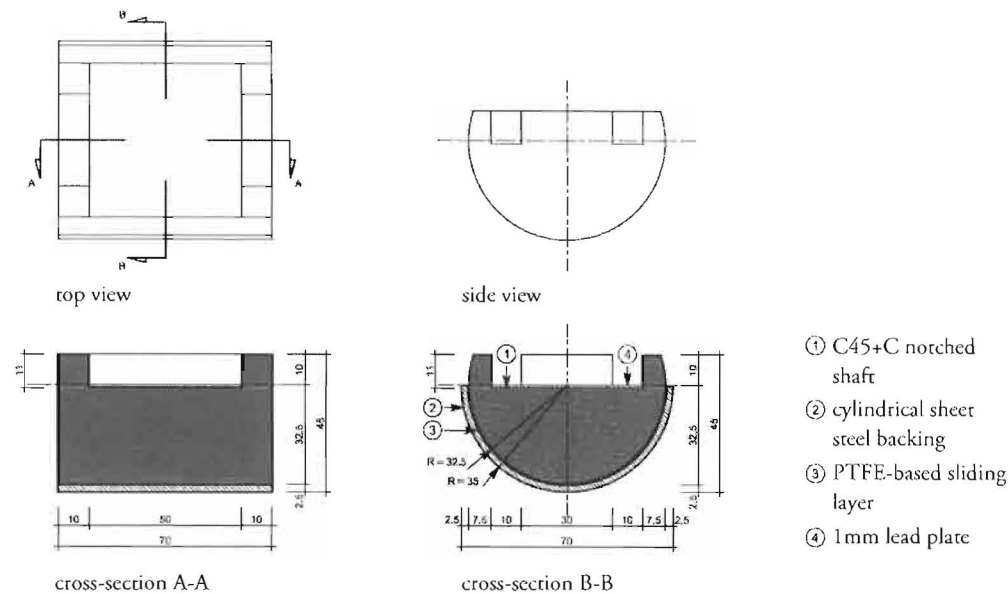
Design of the sliding bearing: a half cylindrical plain bushing and a notched shaft.
